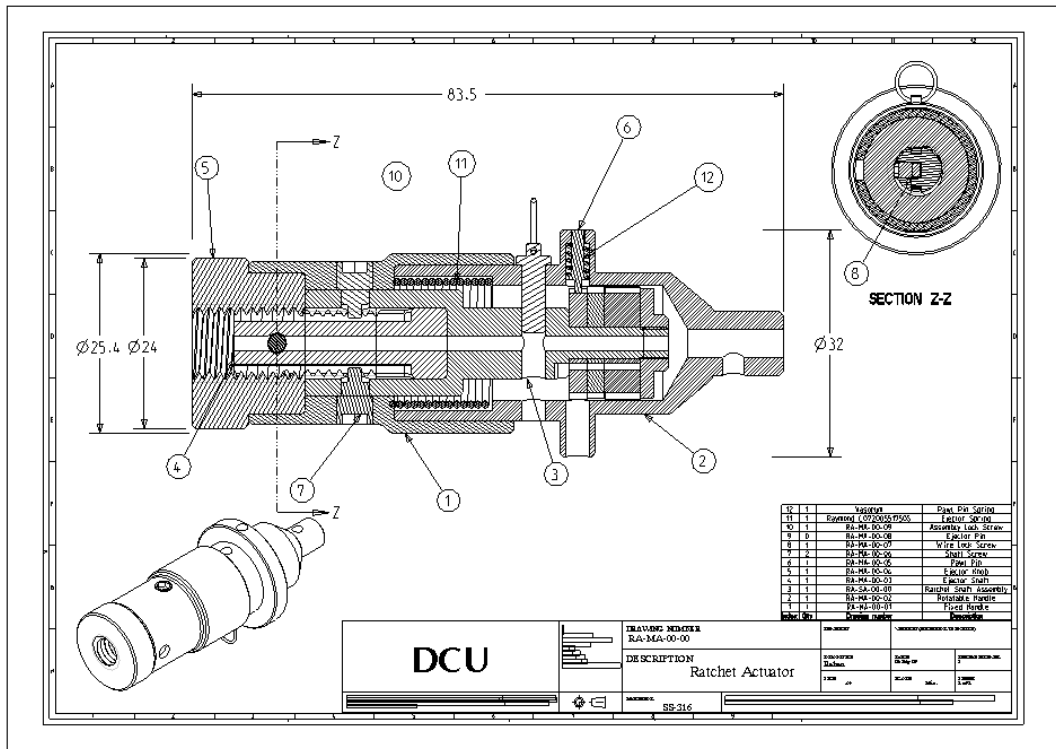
FINAL ACTUATOR ASSEMBLY
